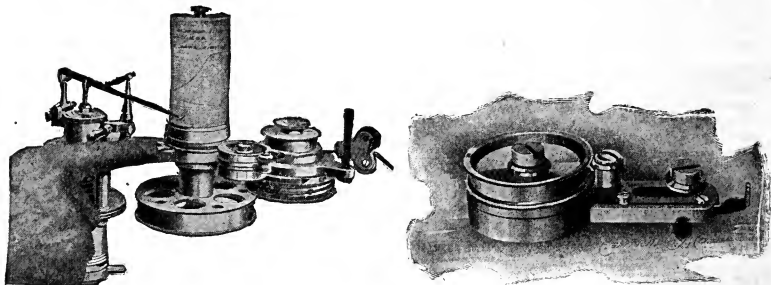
,534.—Stopping the paper drum of Trill indicator. Cord connection for engine equipped with a reducing motion.
